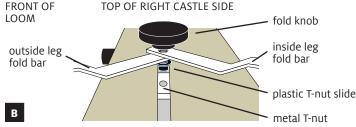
ATTACH CASTLE ASSEMBLY TO LEGS
